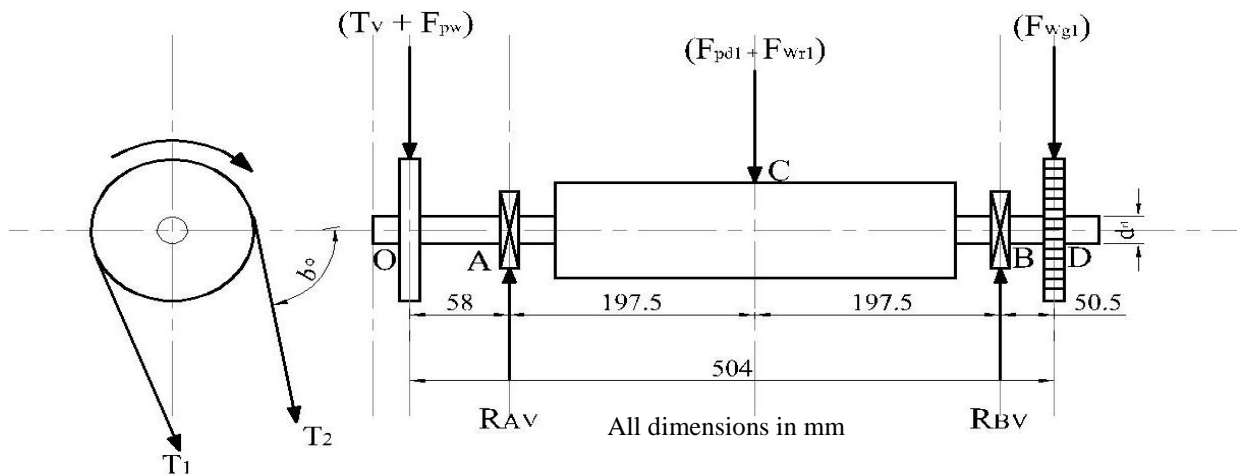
Roller-1 main shaft carrying the periwinkle cracking roller with a pulley, two bearings (A and B) and a gear.
